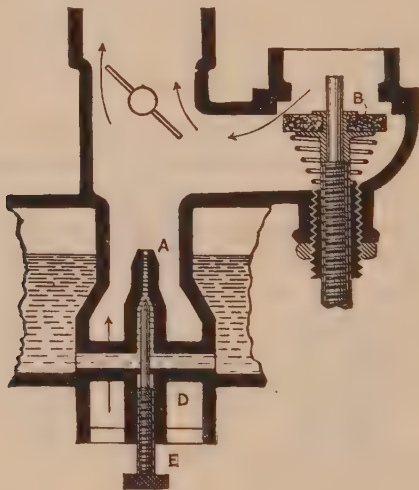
The mixing chamber with its appendages. Illustrating, in general, the arrangement of parts, the primary, and secondary or auxiliary air passages; auxiliary valve, spring and adjustment; the spray nozzle with needle valve and the throttle valve. The arrows indicate the direction of the entering air currents and course of mixture.
